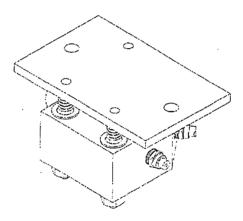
Spray Nozzle Assembly – Guardrail Mount
